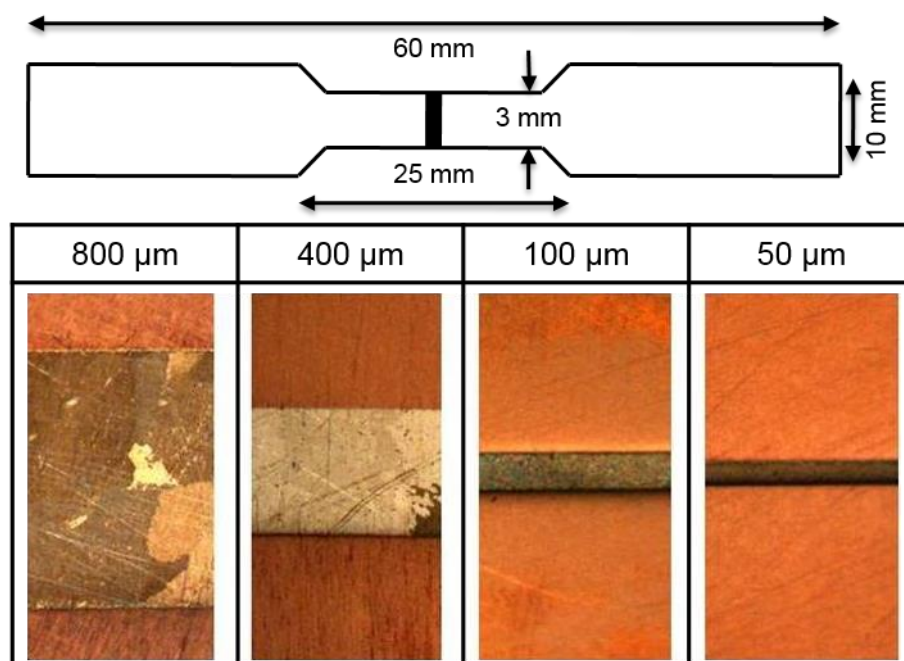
Schematic picture of the specimen geometry (Cu/Sn3.5Ag0.75Cu/Cu) and illustration of the fabricated solder gap size.
